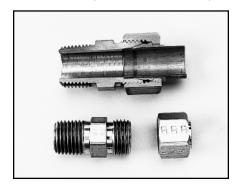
Assembled Intru-Lok (Ferrule "Bites" into tubing)
